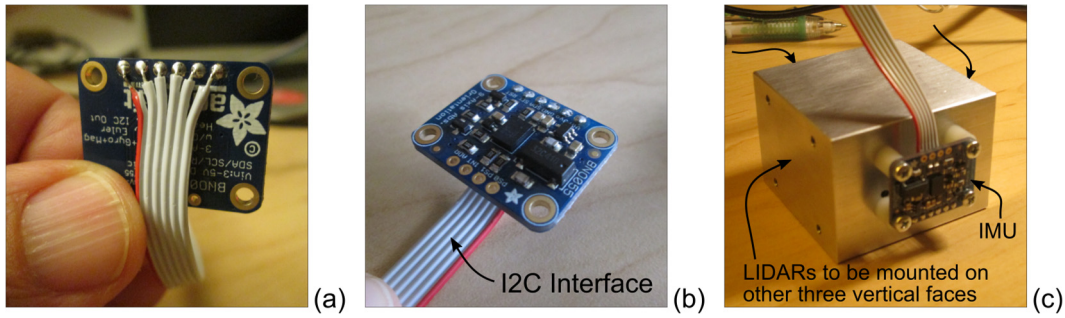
Detail of IMU assembly on the LIDAR head: (a) Cable soldering on the back face; (b) component side shown; and (c) fixed to the LIDAR head block, where the LIDAR are fixed too.
